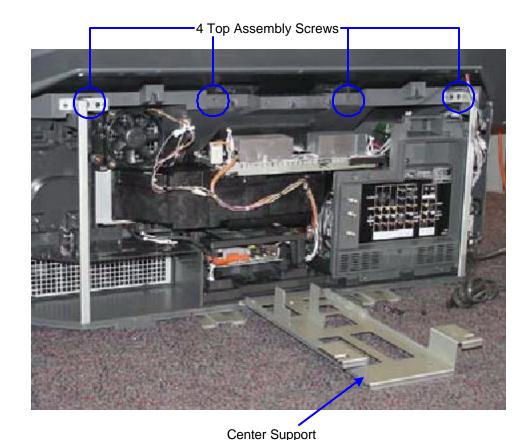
OPTICAL UNIT ASSEMBLY
